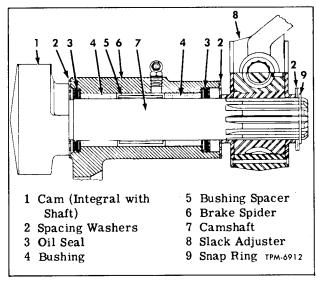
Front Brake Camshaft and Slack Adjuster Mounting
